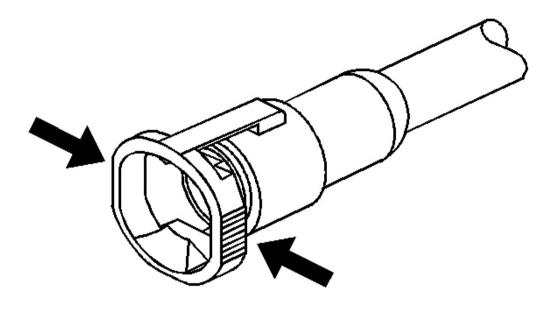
Releasing Connector Courtesy of GENERAL MOTORS CORP.
